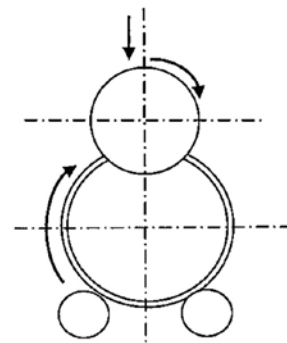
Pipe-rotating type rotary cutter¹
